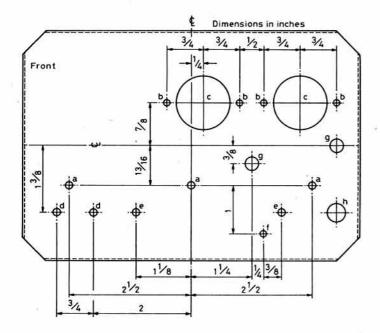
Left-hand screen (with flanges away from viewer). (a) 4BA clearance hole for bolting to chassis. (b) 6BA clearance hole for fixing valveholder. (c) 1-125in dia hole for valveholder. (d) 4BA clearance hole for mounting C12. (e) 4BA clearance hole for mounting RFC5. (f) 6BA clearance hole for fixing earth tag. (g) 0-25in dia hole for grommet. (h) 0-375in dia hole for grommet
